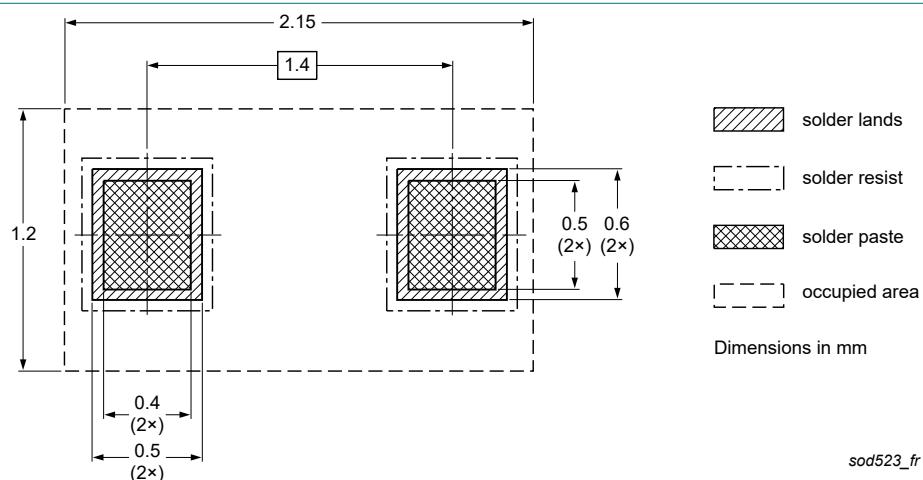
Reflow soldering footprint for SC-79 (SOD523)
